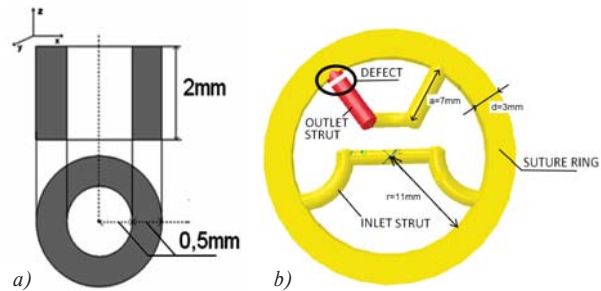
a) Dimension of the coil, b) Dimension of the BSCC heart valve
